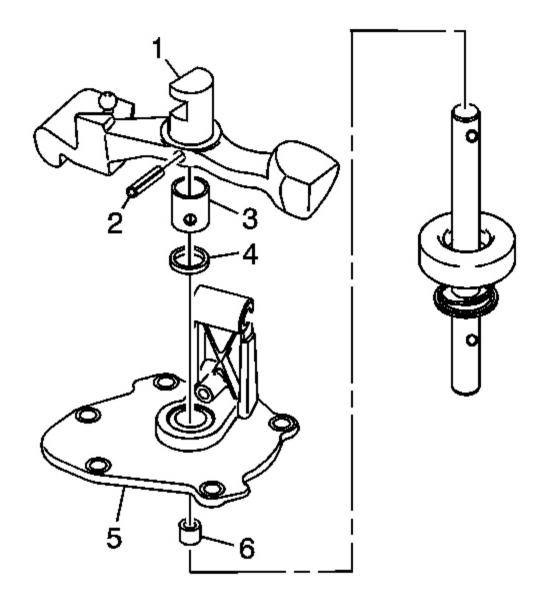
Shift Lever, Cover, Bushing, Roll Pin, Seals & Bearing Courtesy of GENERAL MOTORS CORP.
